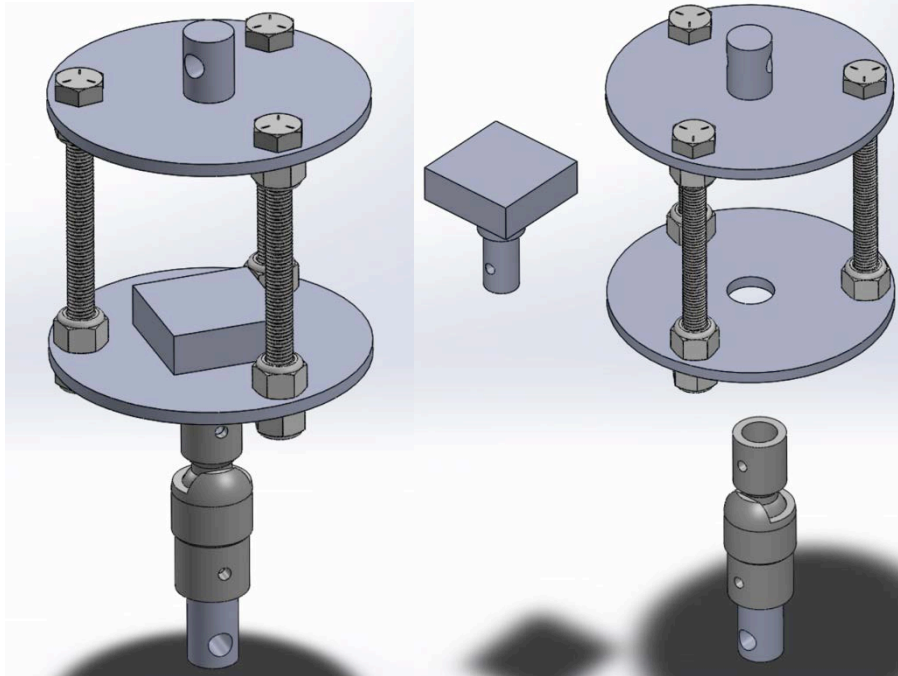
The second iteration (inverted assembly) of our testing fixture. Changes to the sample geometry were taken into account when defining plate and hole dimensions.
